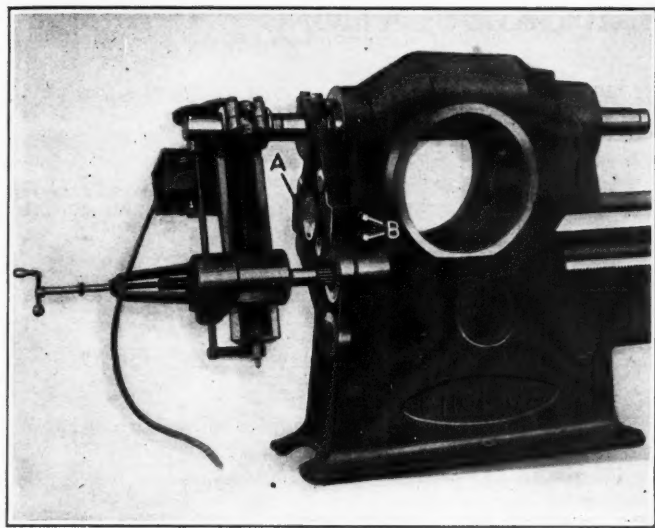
Radial Drilling Machine set up for drilling Holes for Feed-screw, Lead-rod, and Screws for securing Feed-box to Bed
